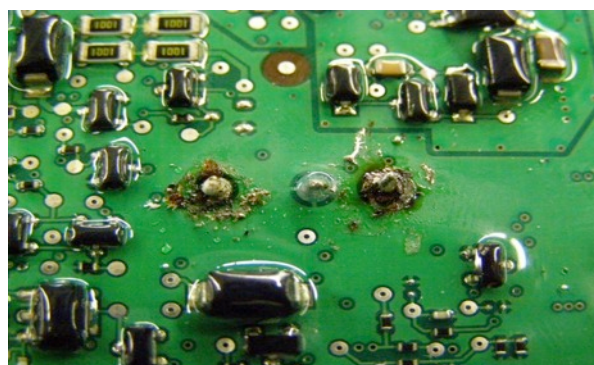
HumiSeal UV coating removed around a solder joint by thermal displacement
